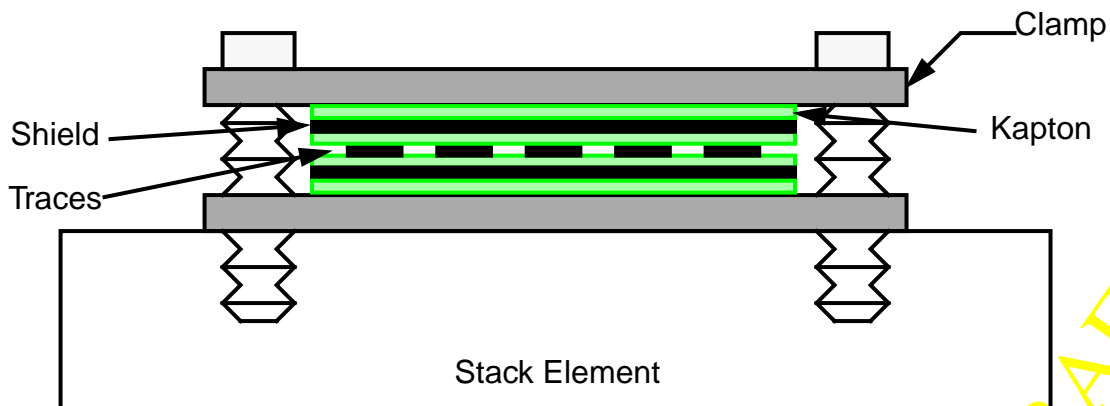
Shielded Cable Configuration Showing Stack Fasteners
